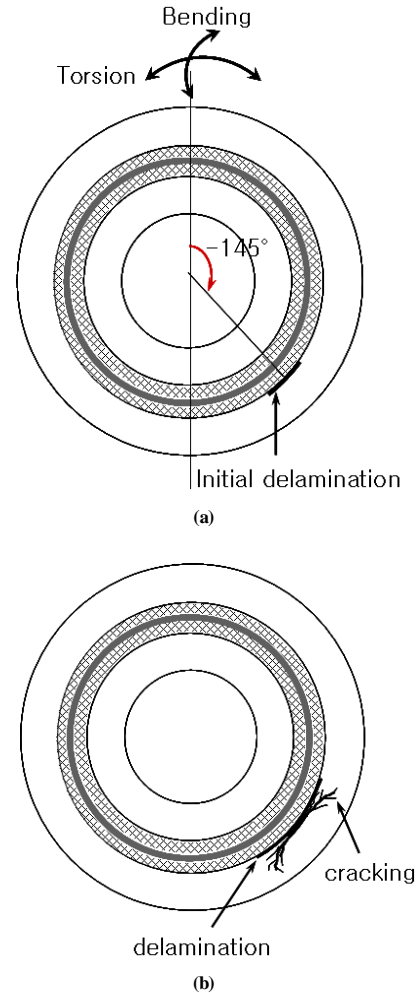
Failure mechanism of rubber hose assembly for automotive hydraulic brake.
